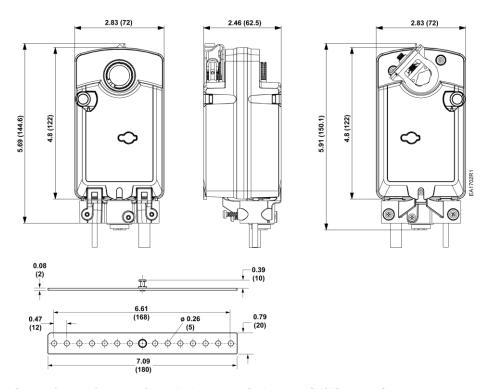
Dimensions of OpenAir GJD Actuator in Inches (Millimeters).
